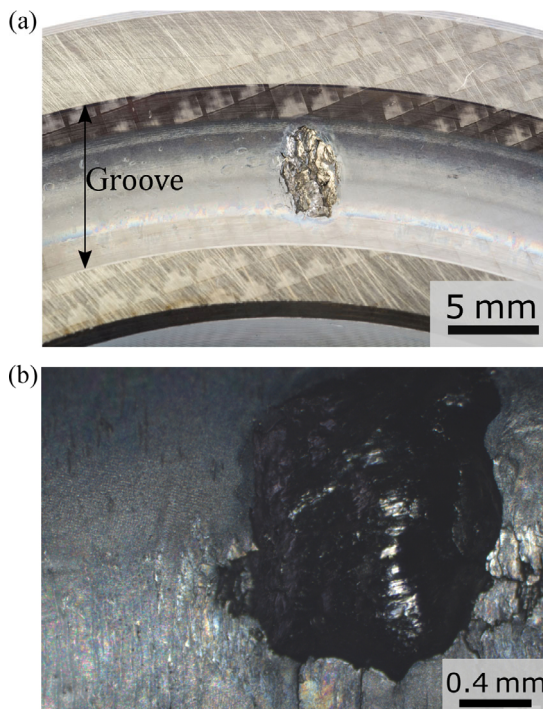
Pitting damage on Cross30 of the fatigue test (a), and an enlargement (b). The pit occurred in the groove of a bearing washer with a diameter of approximately 3 mm.
